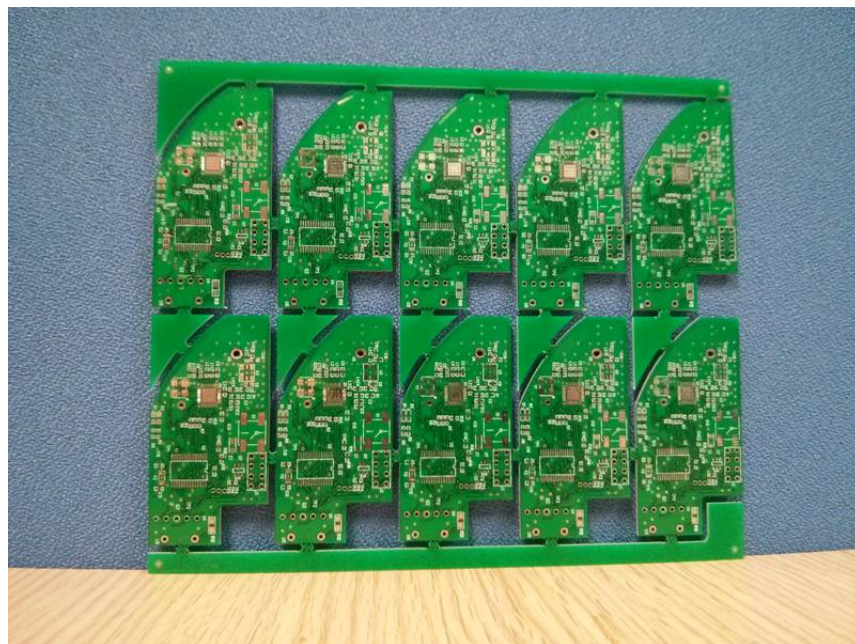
Unpopulated panelised final PCB, 5 x 2 array.
